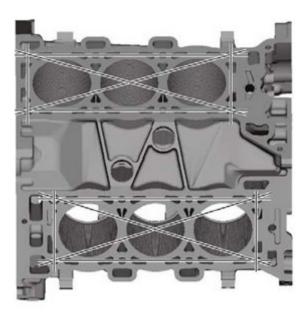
Checking Cylinder Head Mating Surface For Distortion Courtesy of SUZUKI OF AMERICA CORP.
